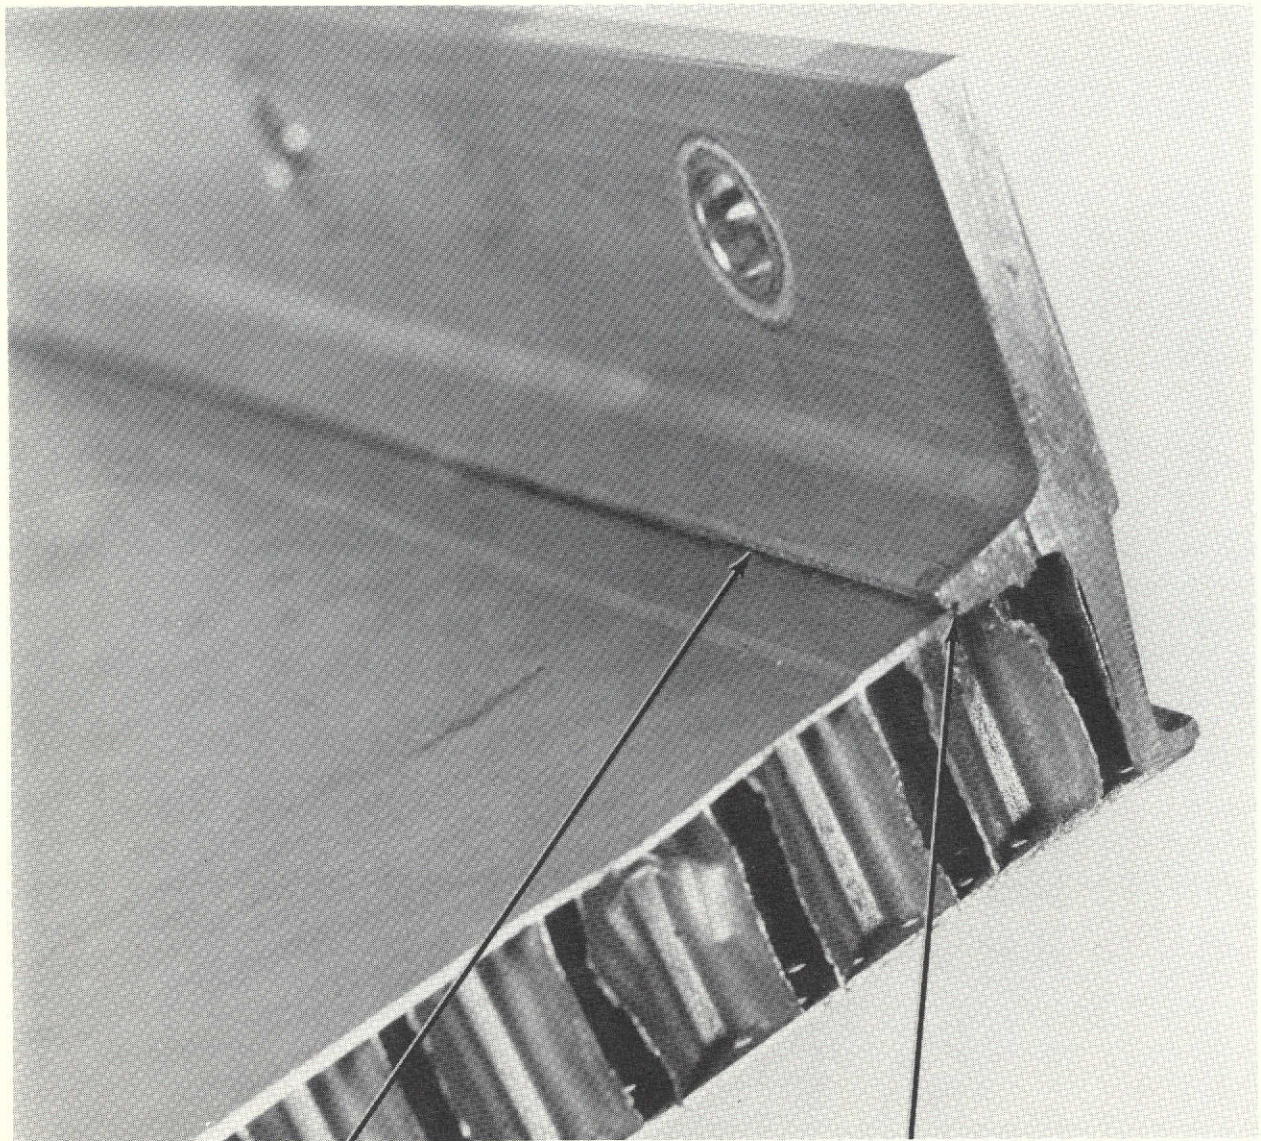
TYPICAL FLANGE PANEL FAILURES - FATIGUE TEST
